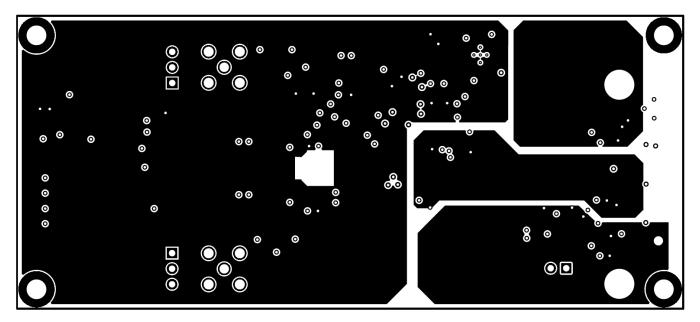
ADS8881EVMV2 PCB Layer 3: Power Planes
